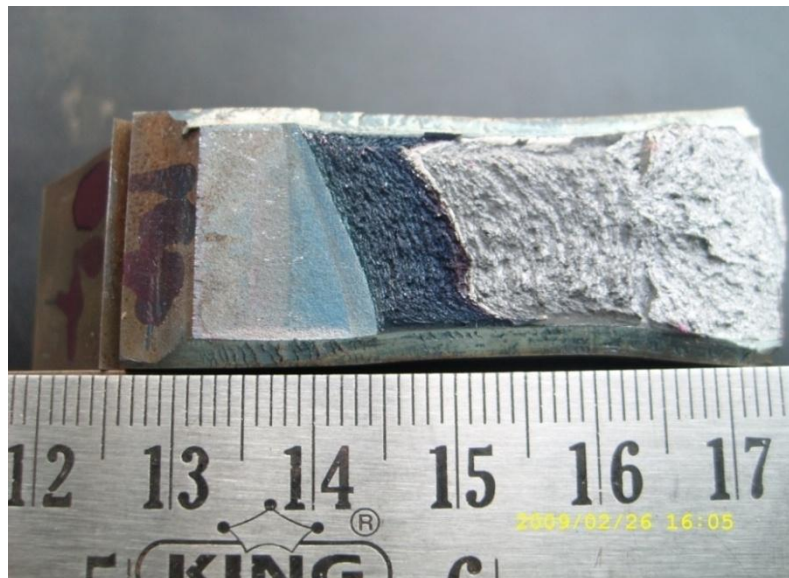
Typical fracture specimen (GM-06) of monotonic test for 20MnMoNi55 steel at elevated temperature. Monotonic *J-R* specimens show a thumbnail shape a head of the fatigue crack.
